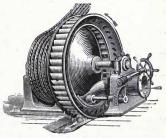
Girard-turbine with horizontal shaft for high falls. Cover removed.
